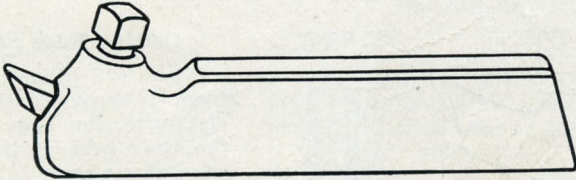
Tool Holder with Inserted Cutting Bits of High Speed Steel
